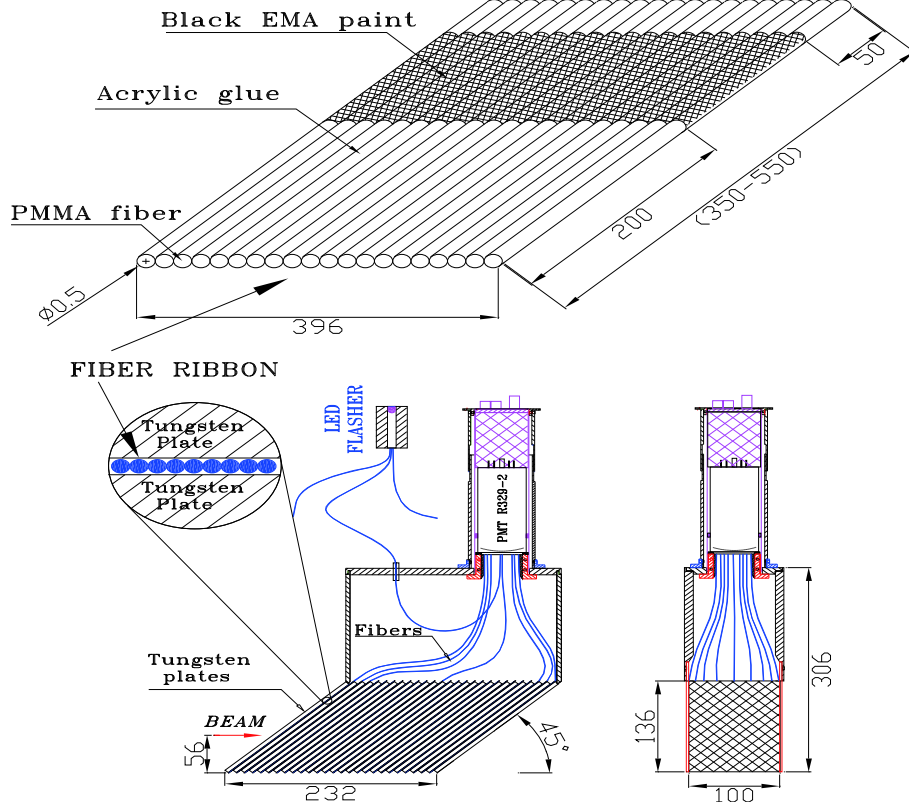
Mechanical design of the production tungsten module. The unit is a millimeter.
